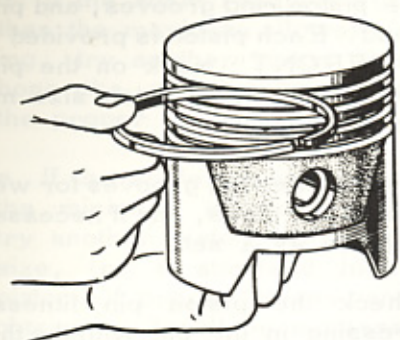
Rolling Piston Ring in Ring Groove X4943
